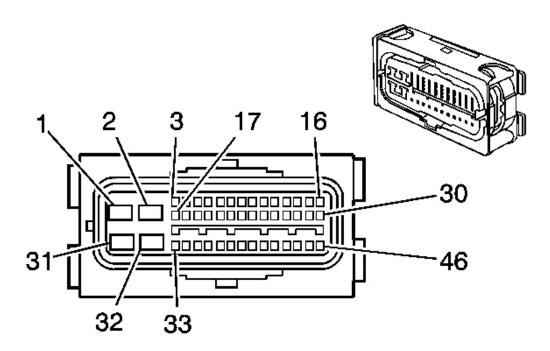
Electronic Brake Control Module (EBCM) C2 Connector End View Courtesy of GENERAL MOTORS CORP.
